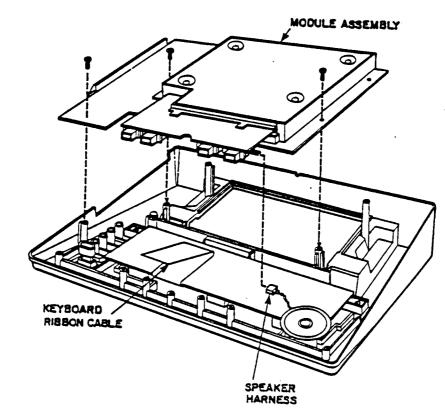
A l'ARI 800 Console, Module Assembly Removal
